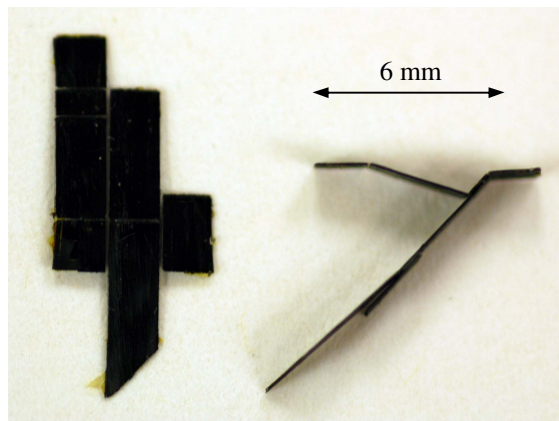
Flat and Fully Assembled Slider Crank Leg
